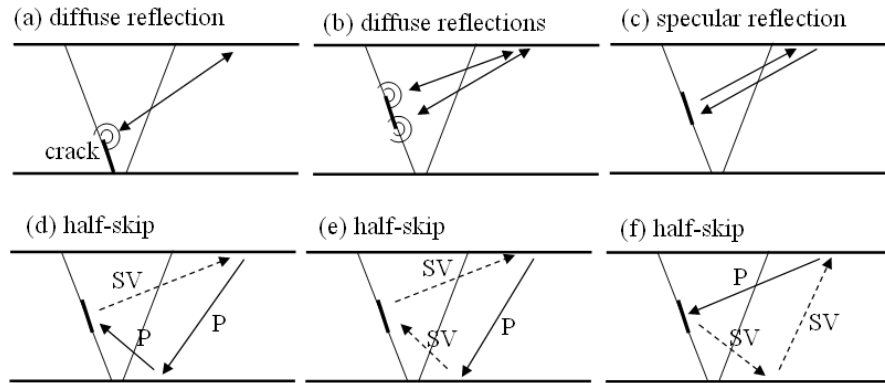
Possible inspection scenarios for cracks at the far weld boundary: diffuse reflection from one crack tip (a) or both crack tips (b); (c) direct reflection; or half-skip scenarios of varying wave modes: (d) P.P-SV; (e) P.SV-SV and (f) P-SV.SV.
